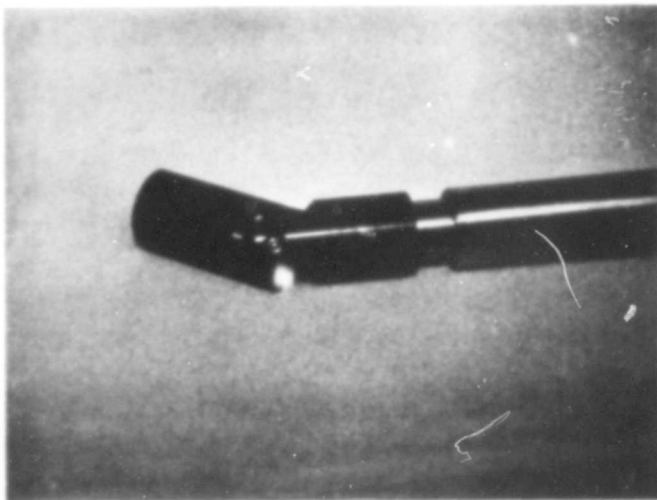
HOOKE JOINT MOUNTED ON ROTOR
